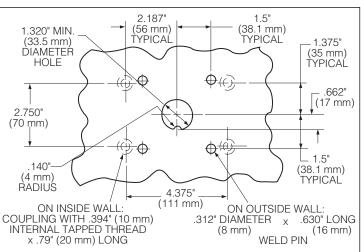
Hole, coupling and weld pin placement (Bolt-In system).
